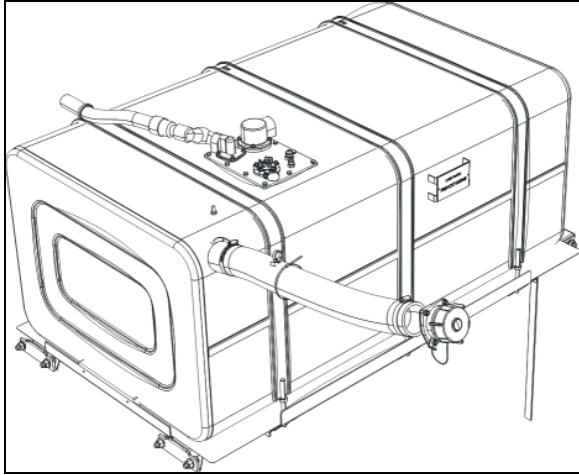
STEEL FUEL TANK ASSEMBLY
